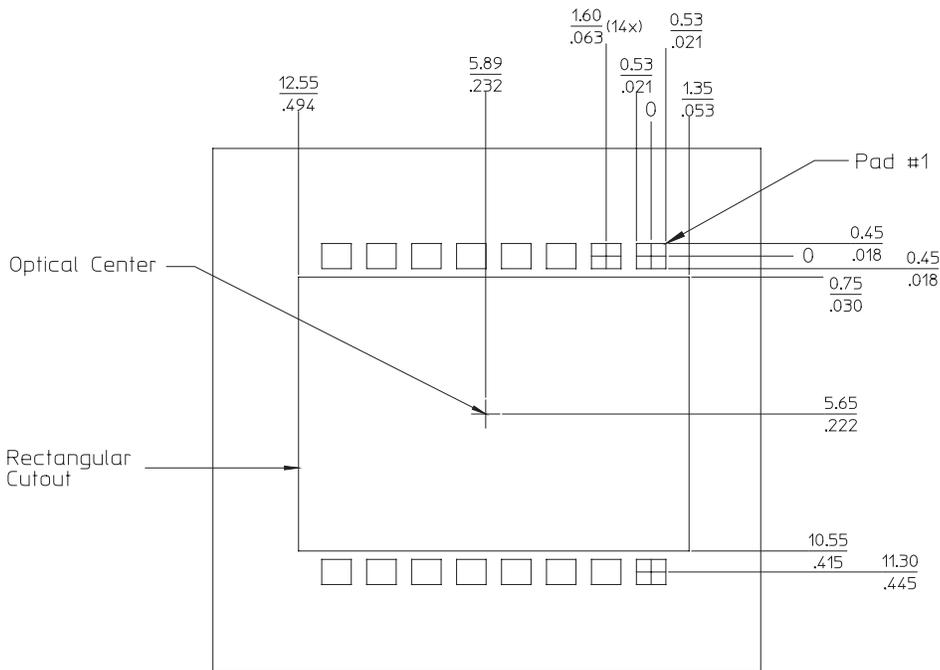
Customer PCB design for ADNS-3550 sensor (PCB with cut-out)
